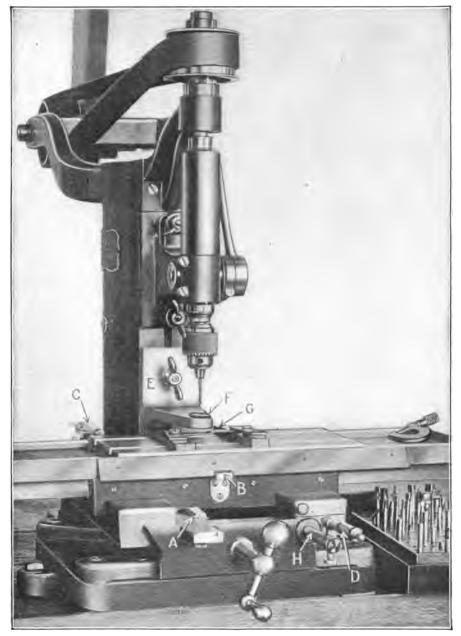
DRILL PRESS FITTED FOR LAYING OUT WORK ACCURATELY
